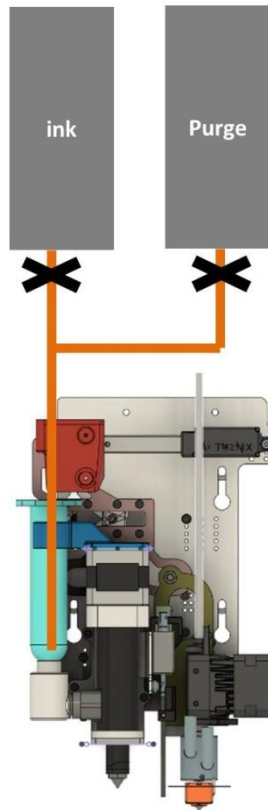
Diagram of the Ink feedstock and purge system on the extruder head of the customized printer.
